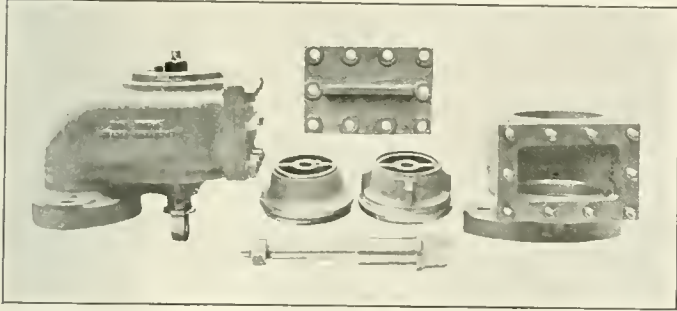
Lockyer Double Beat Valve Showing Assembled Valve and Separate Parts
